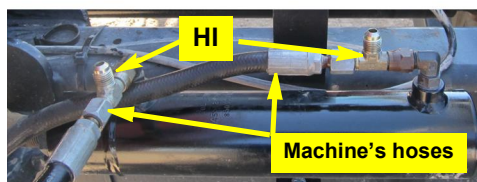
Steering run-tees installed, machine's steering hoses reconnected
